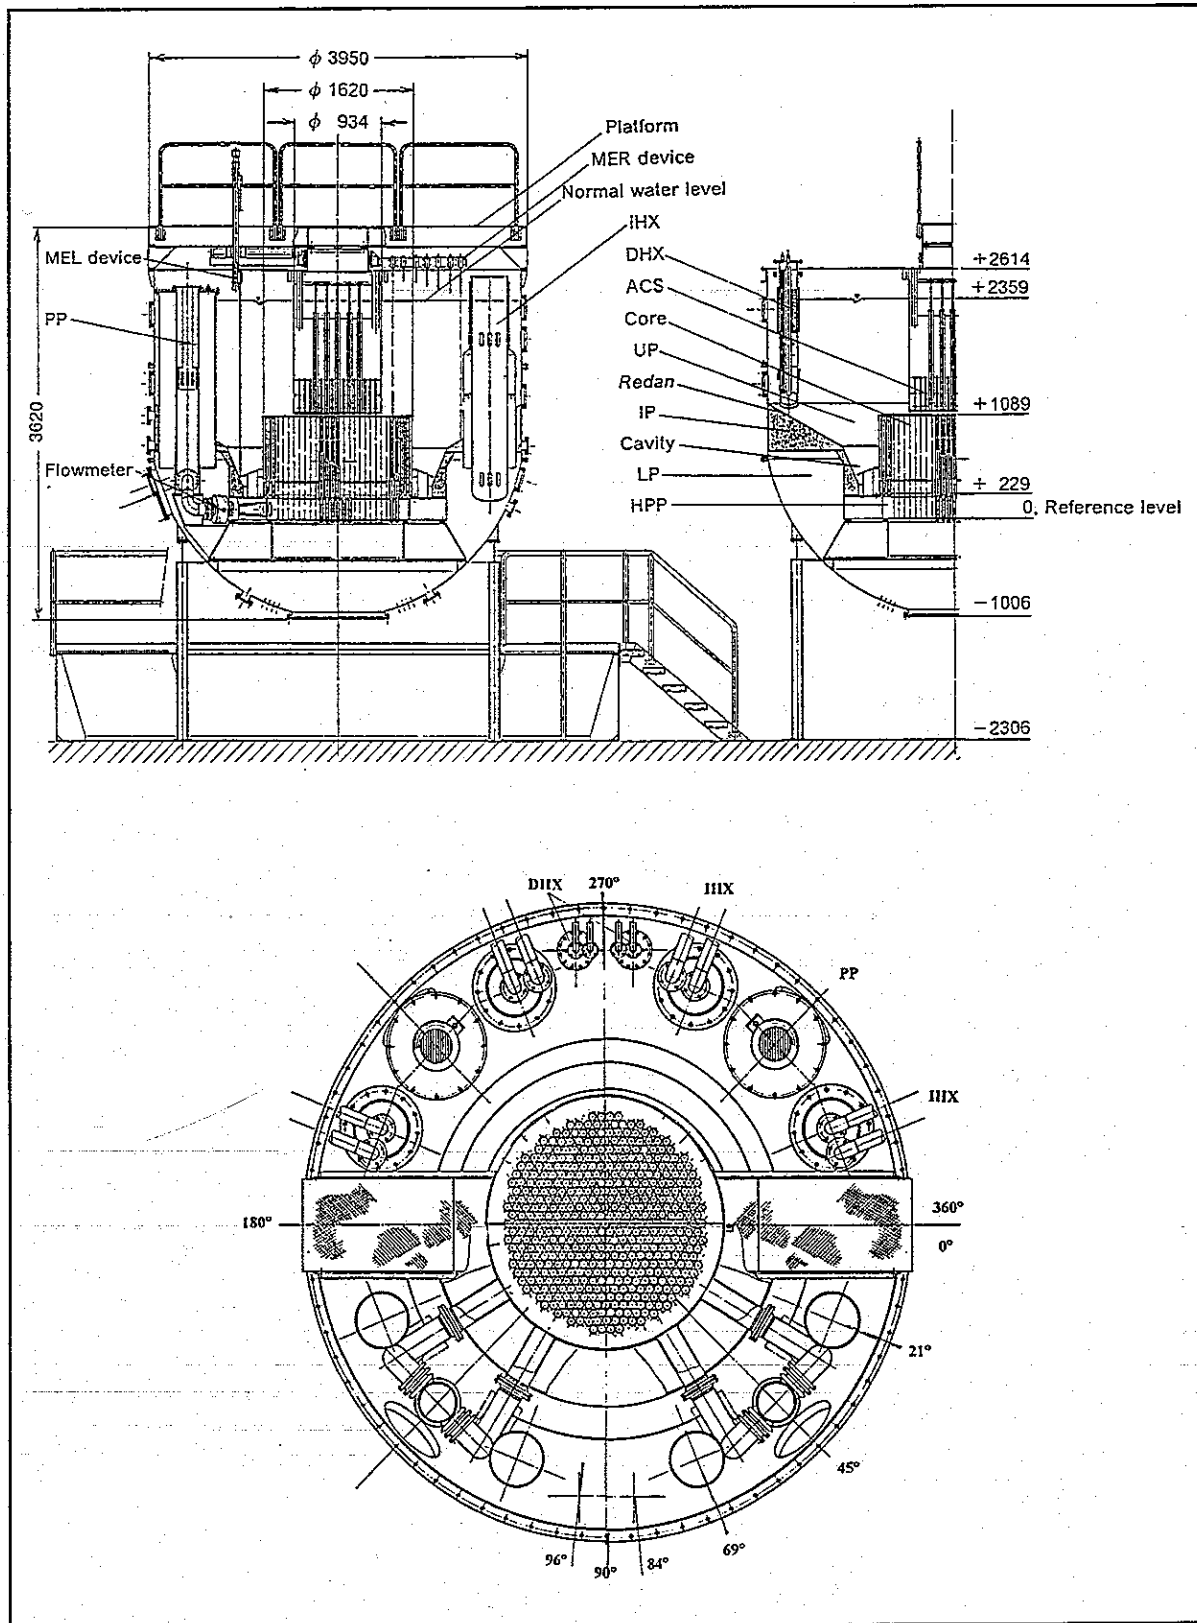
Vertical and horizontal cross-sections of the NEPTUN test facility (dimensions in millimeter).
